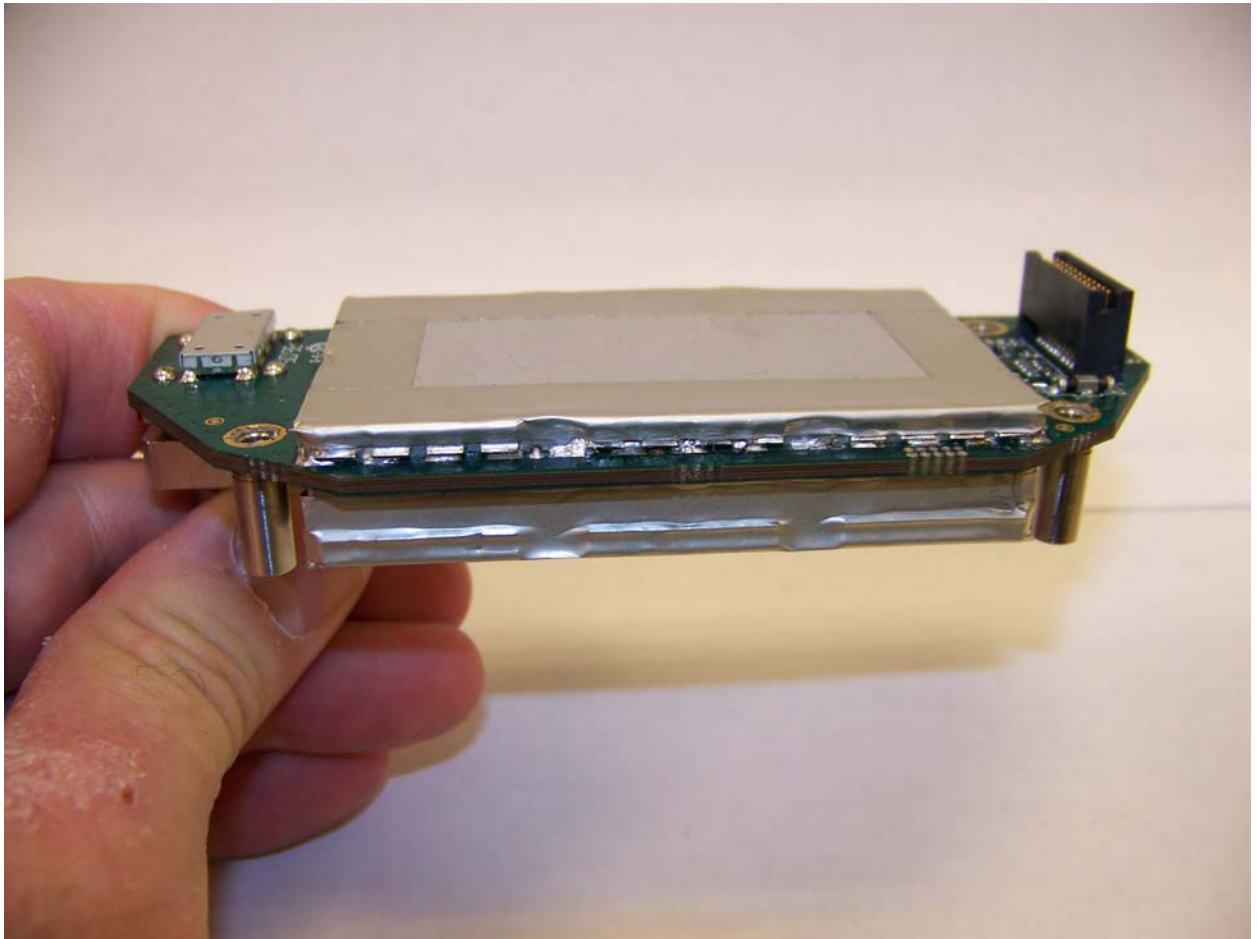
Bottom of EUT, Cover On, Case Soldered and Taped
